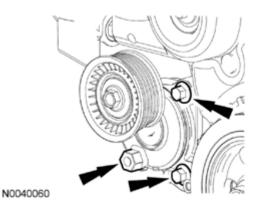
Locating Bolts And Tensioner Courtesy of FORD MOTOR CO.
